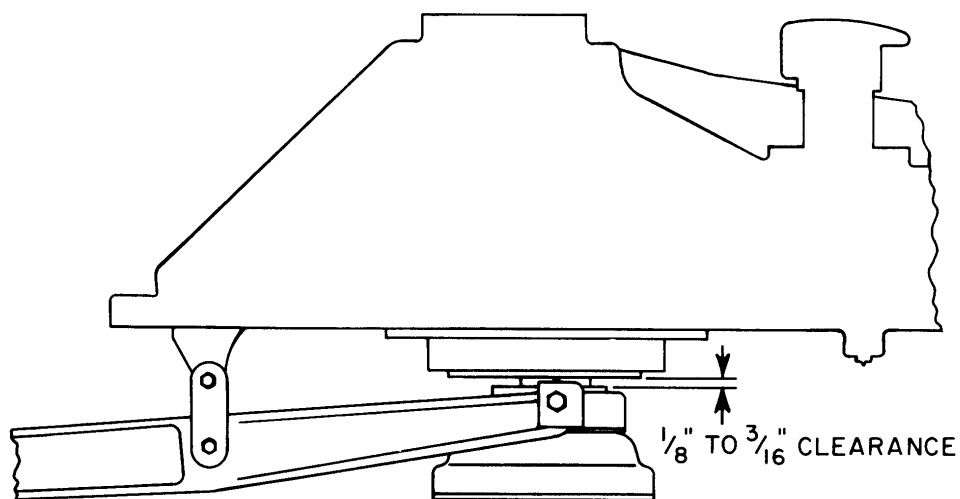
Required clearance between the collective bearing housing and the swashplate mount flange
